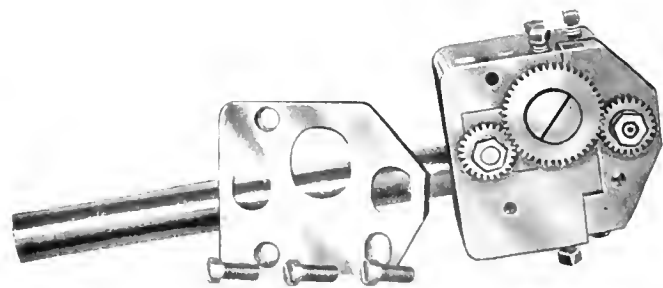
Rear View of Generating Tool with Gear Guard Removed.
